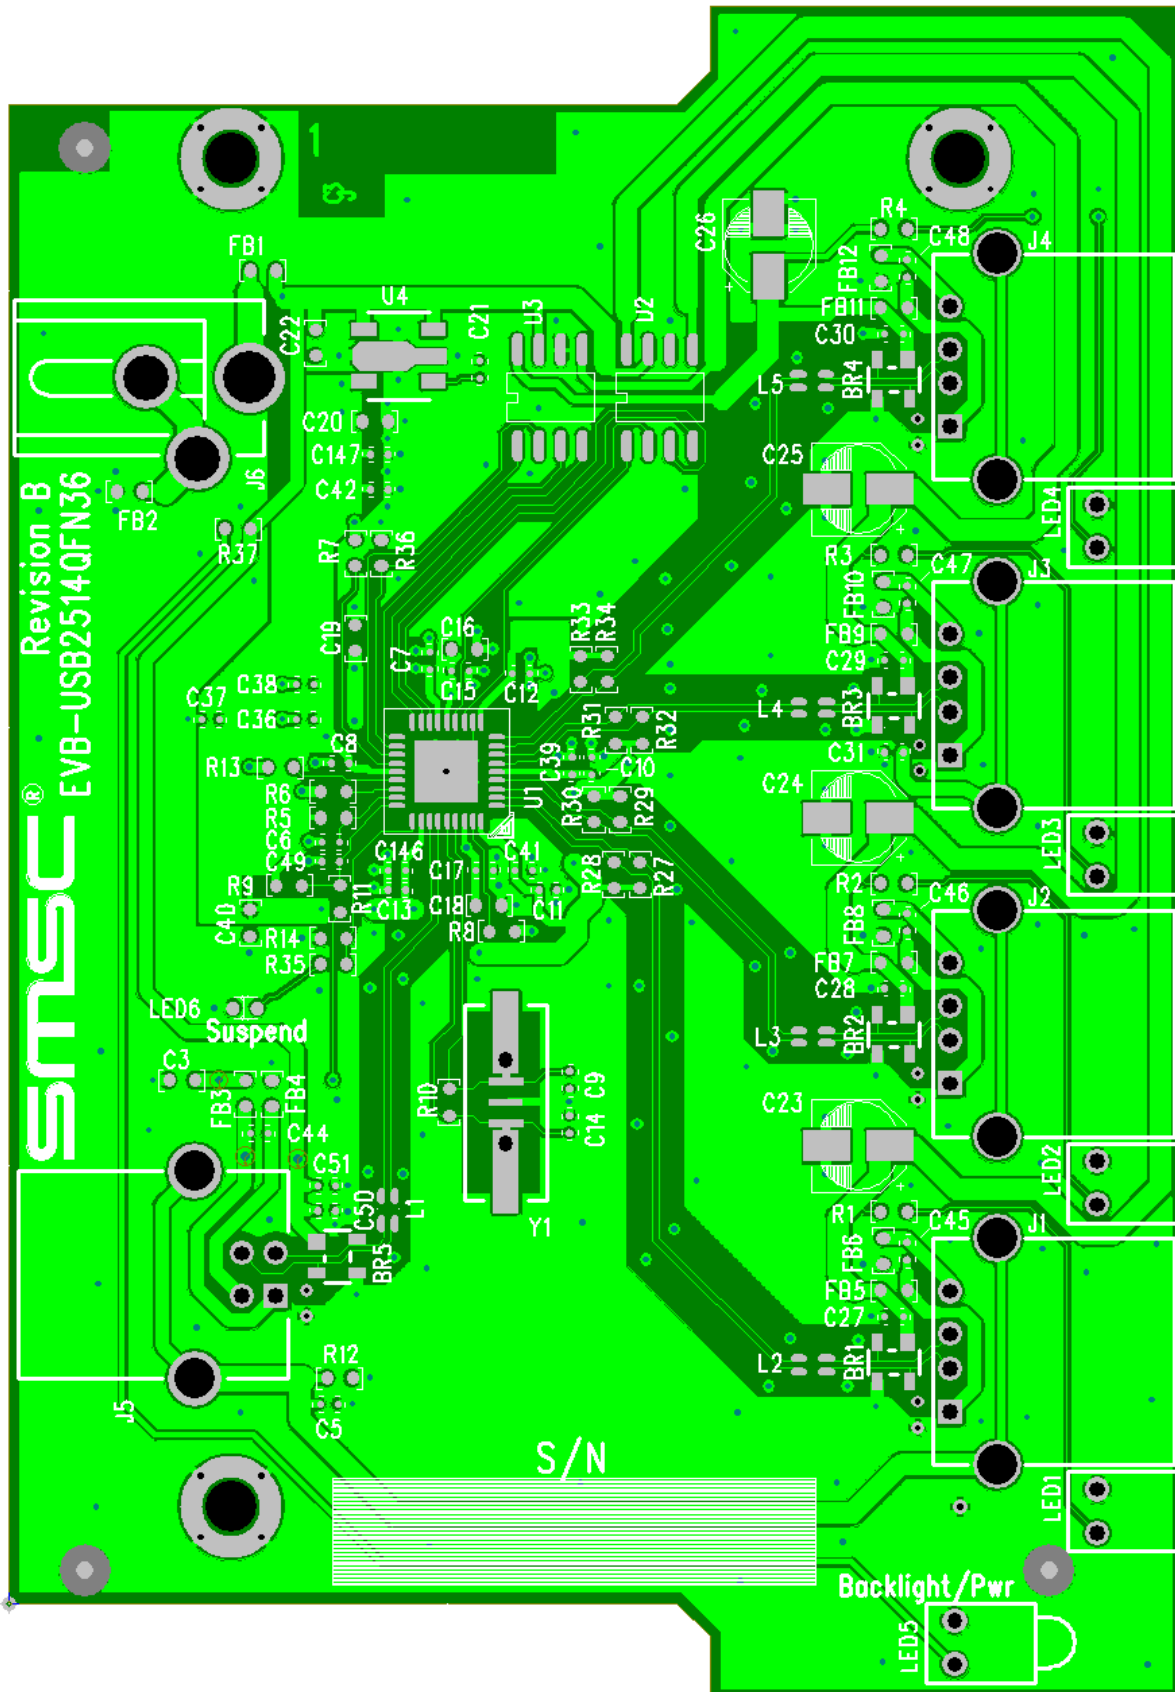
EVB-USB82514-QFN 36-Pin Component Side Top Layer
